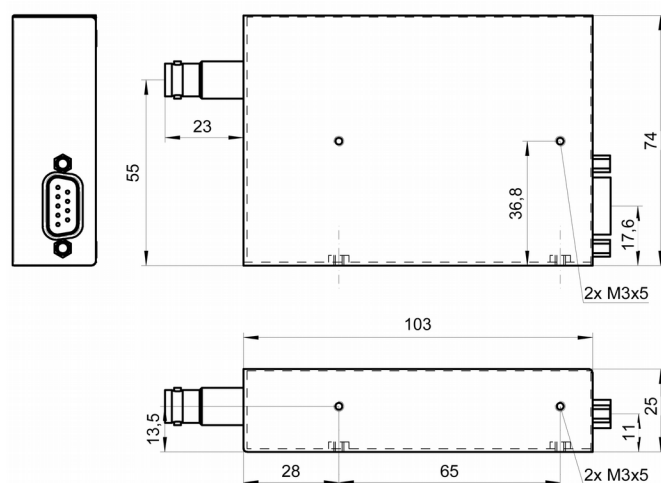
dimensional drawing DPSmini ≥ 8kV / SHV (S10)
